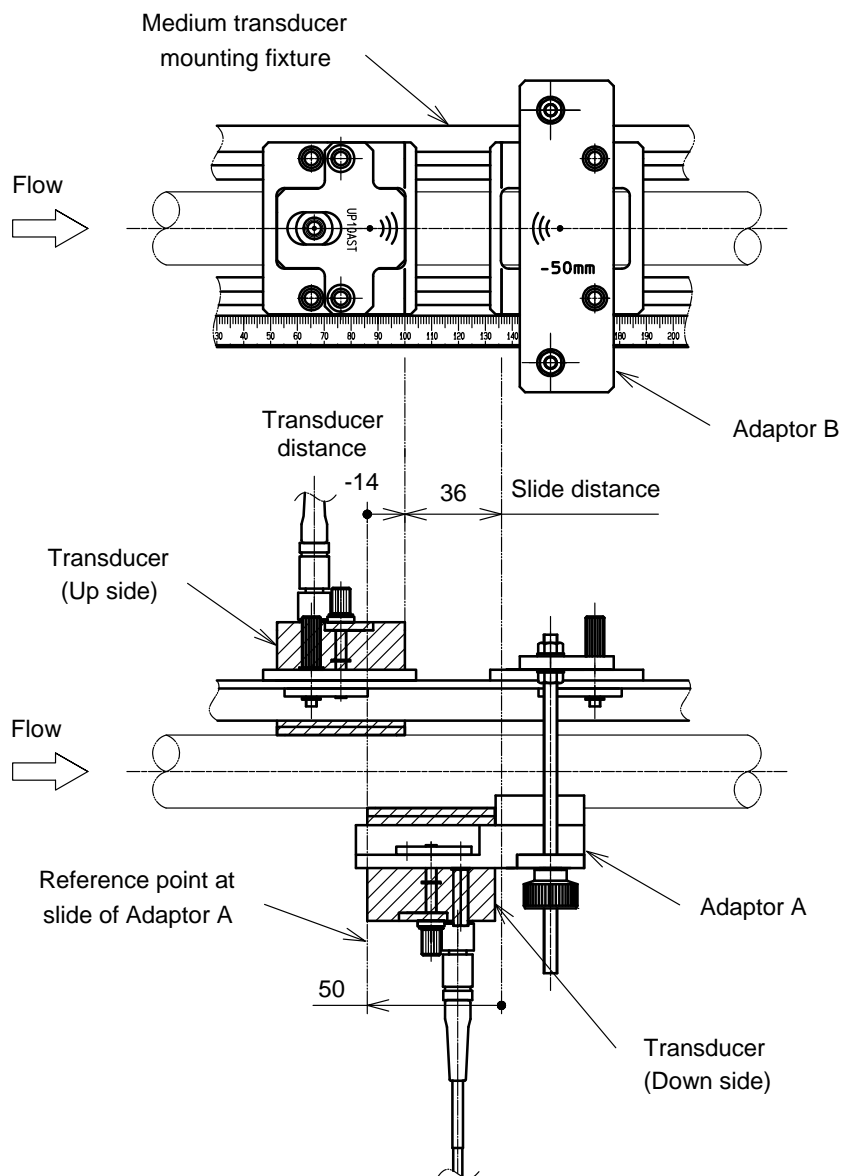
Sample of Z-path method installation (Transducer distance : -14mm)
